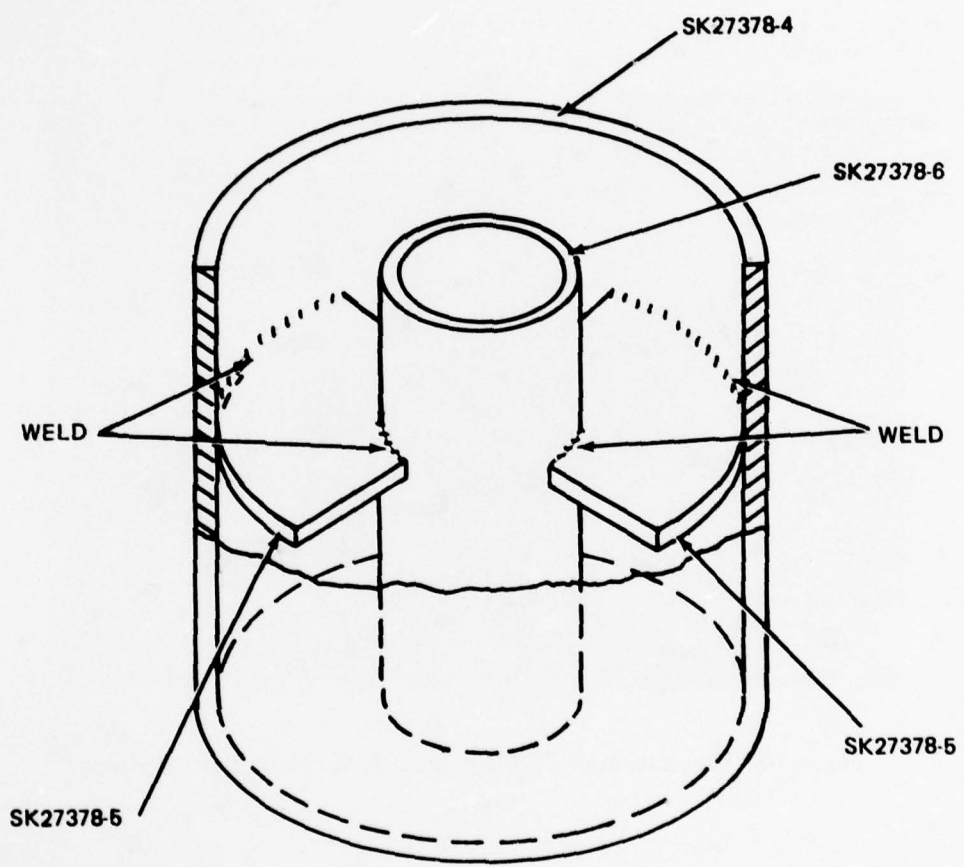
Final Assembly of Outer Rim, Web, and Inner Rim Composite Components.
